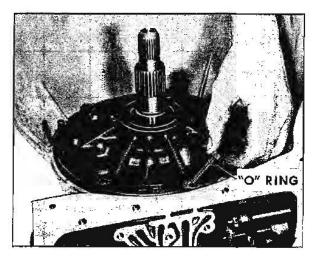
B-132 Installing Oil Pump Retaining Bolts
